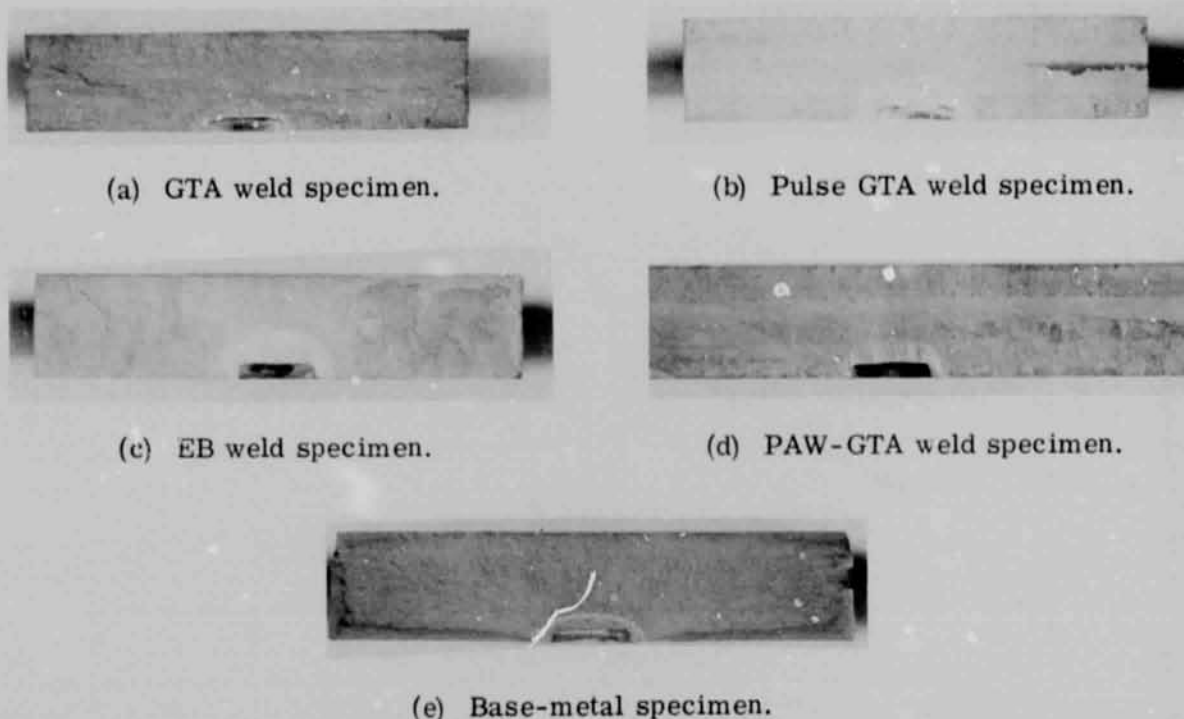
Fracture face photographs of fatigue-cracked specimens.
